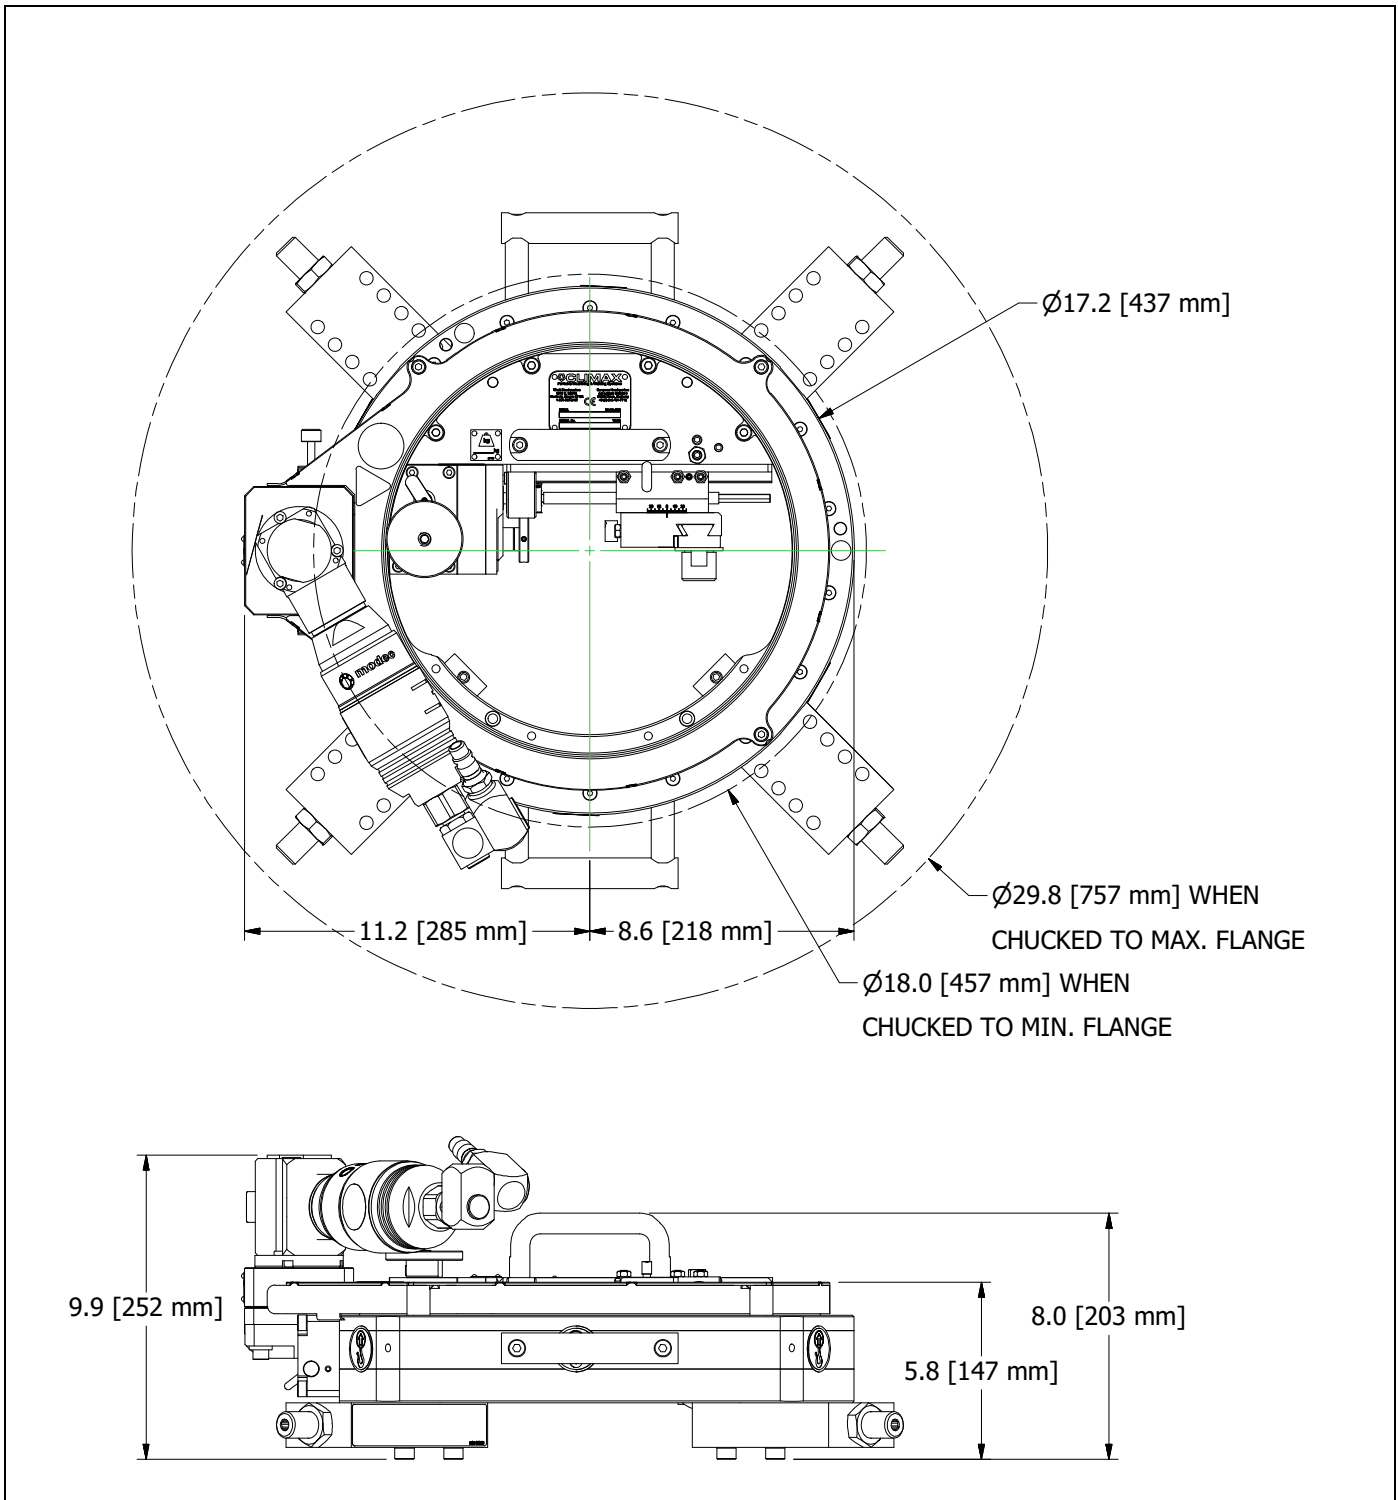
FF2400 MACHINE DIMENSIONS
